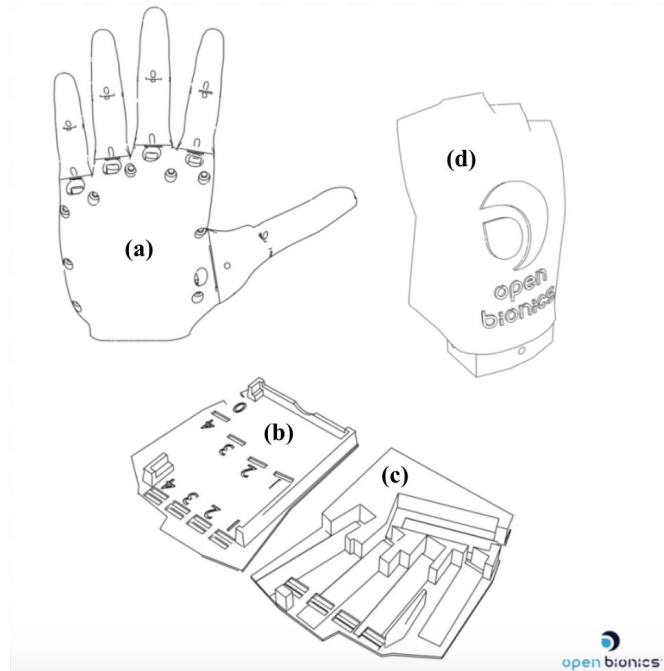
3D printed parts: (a) palm, (b) upper PCB tray, (c) lower PCB tray, and (d) back cover. The front face of the palm and the fingers are all printed as one connected piece in flexible PLA material. This eliminates the need for additional components to control the motion of the finger joints and decreases the number of individual 3D printed parts. The lower PCB keeps the linear actuators in position and the upper PCB keeps the PCB board in position. The back cover encloses all internal components.
